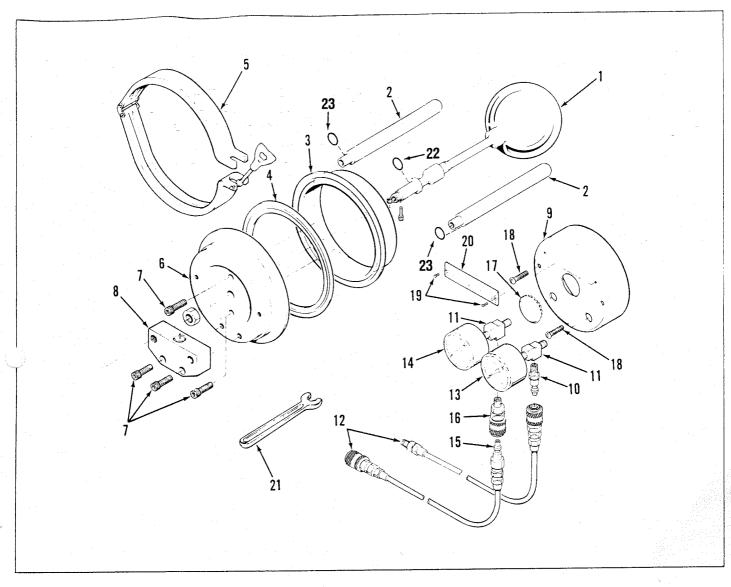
Models 30-101 and 30-102 Level Controls - Exploded View
